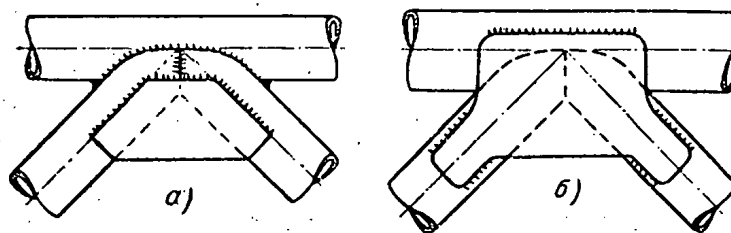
Reinforcing places of juncture by welding of boxes (a) and straps (b)
